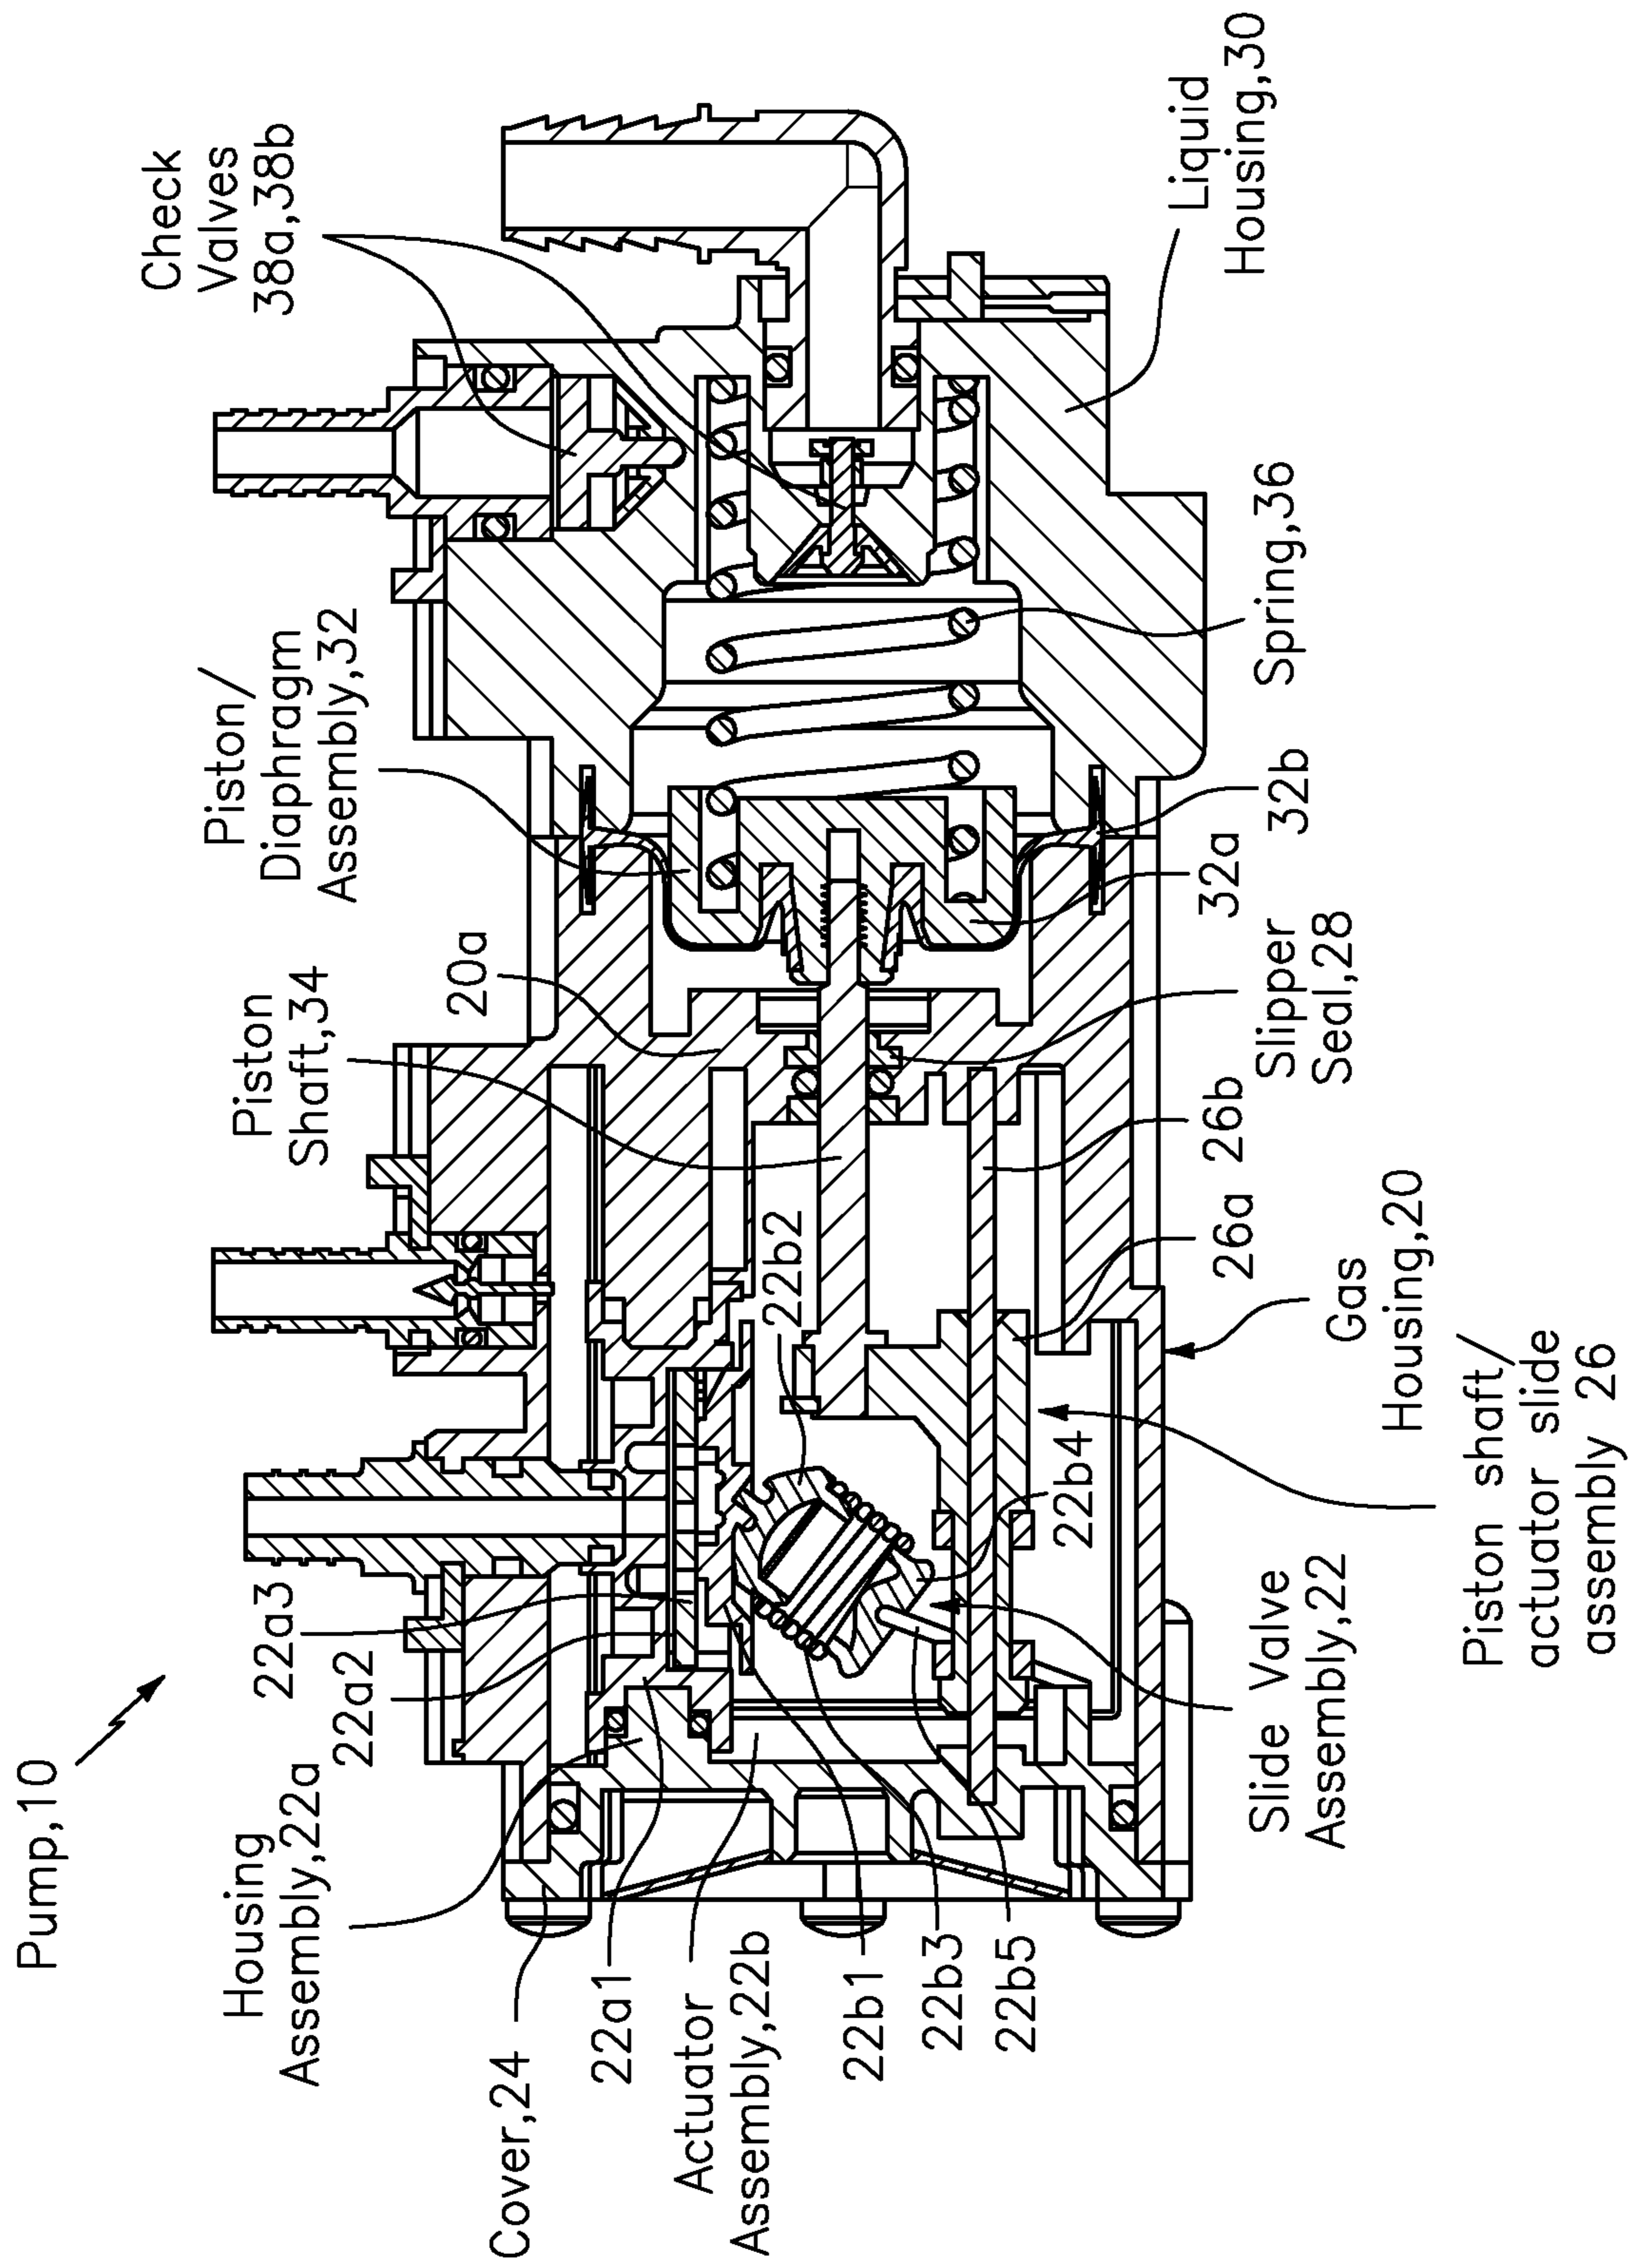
A: Single Piston Fountain BIB Pump – Major Component Layout
